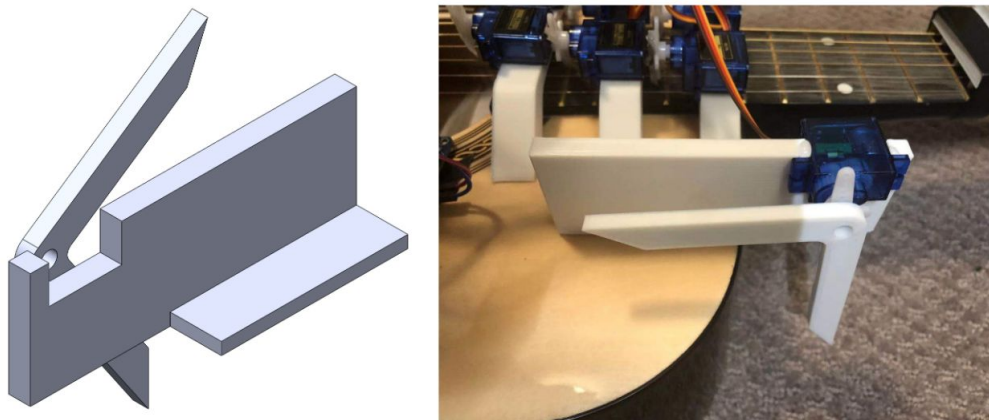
3D printed holder for servo motor and the L-shaped arm
